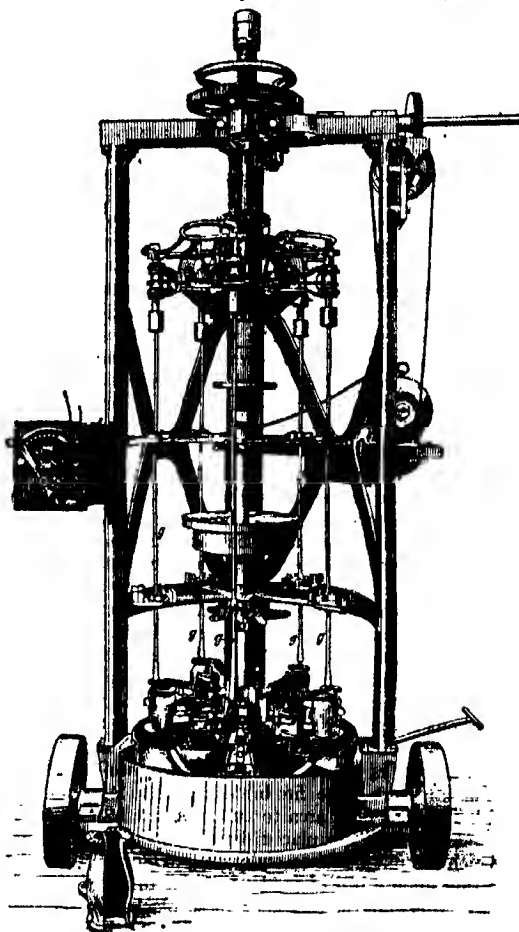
Owens' Glass-blowing Machine. g. g. g. Blowing-irons.
